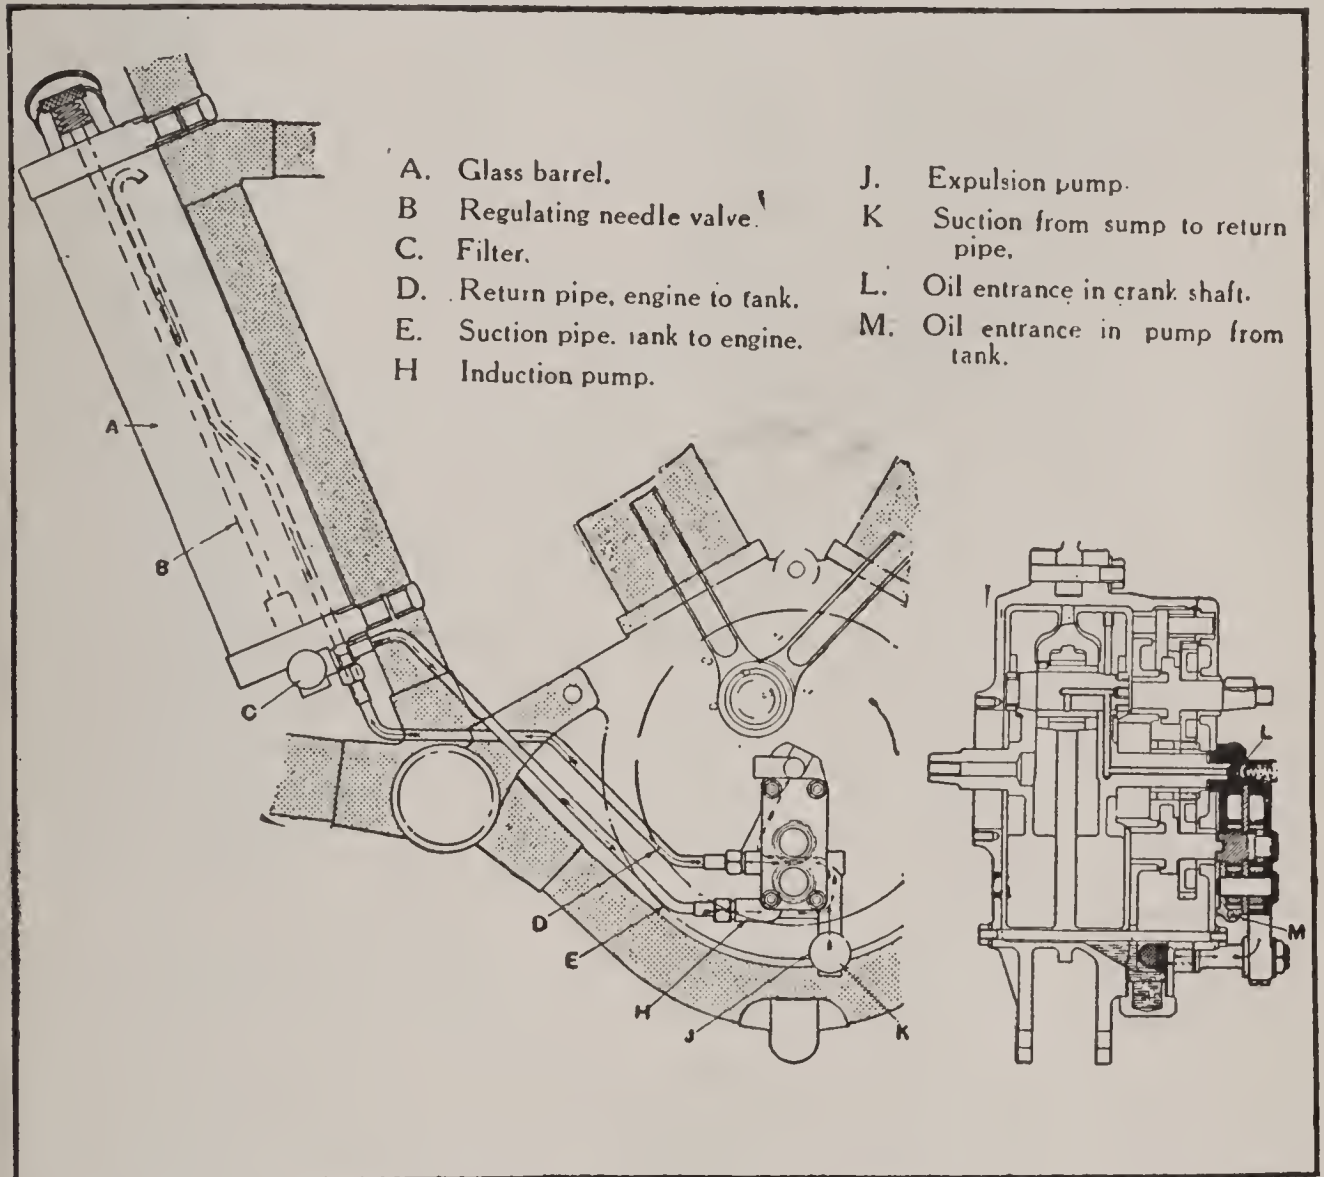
Lubricating System Employed in the Royal Enfield Motorcycle.
